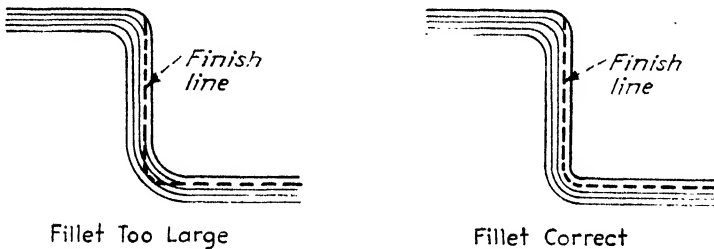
Effect of fillet size when machining is required. When fillets are small fewer flow lines are cut in machining.
